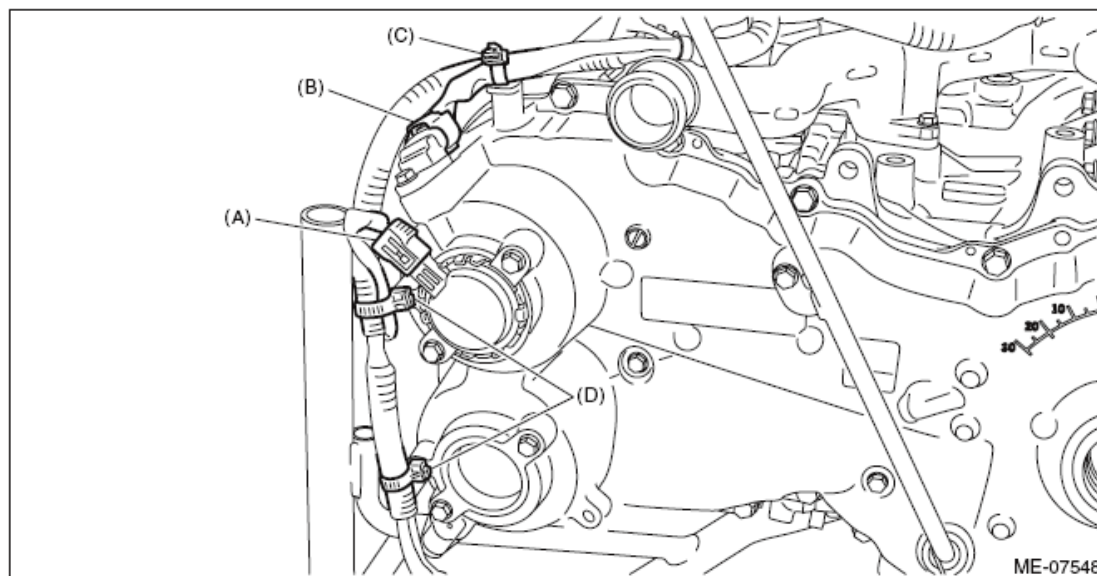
Identifying Oil Control Solenoid Connector And Clips
